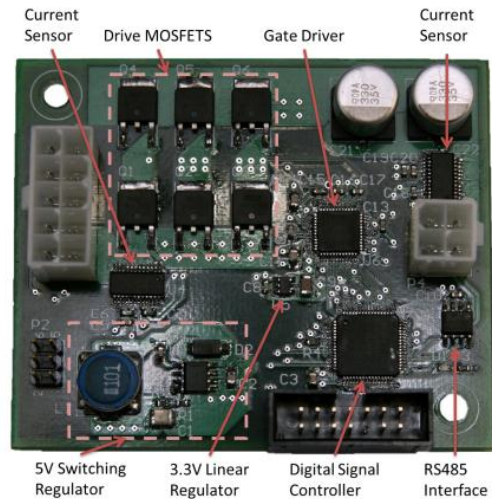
High power 20 Amp motor control board for arm drive motors with current sensing and brake control
